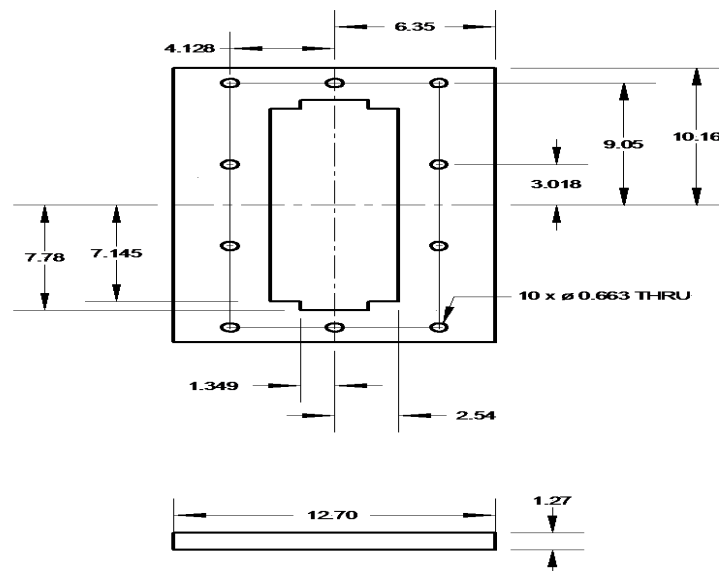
Autosketch Drawing of Beam Fixture Middle Plate [28]
